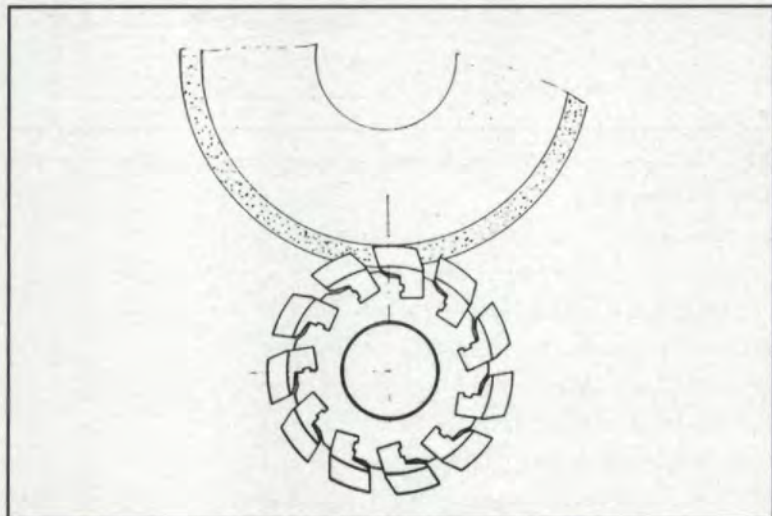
Segment hob blades in form grinding. (Courtesy FHUSA-Fabricacion de Herramientas y Utensilios.)
